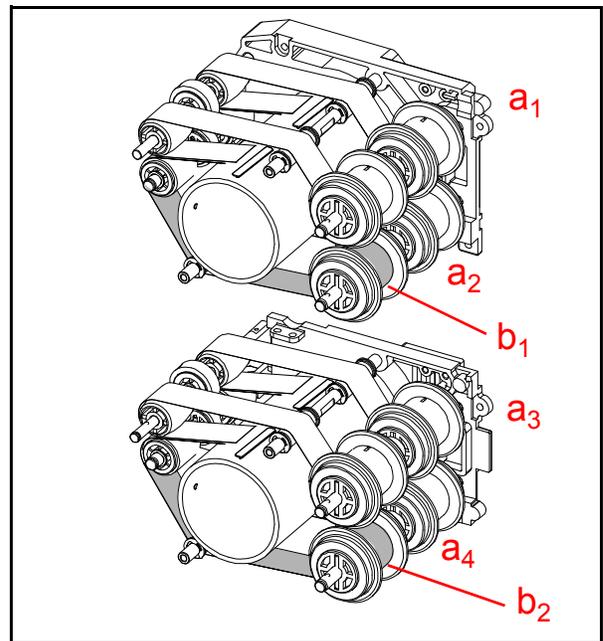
Frame Shaft & Limit Spring Assembly
